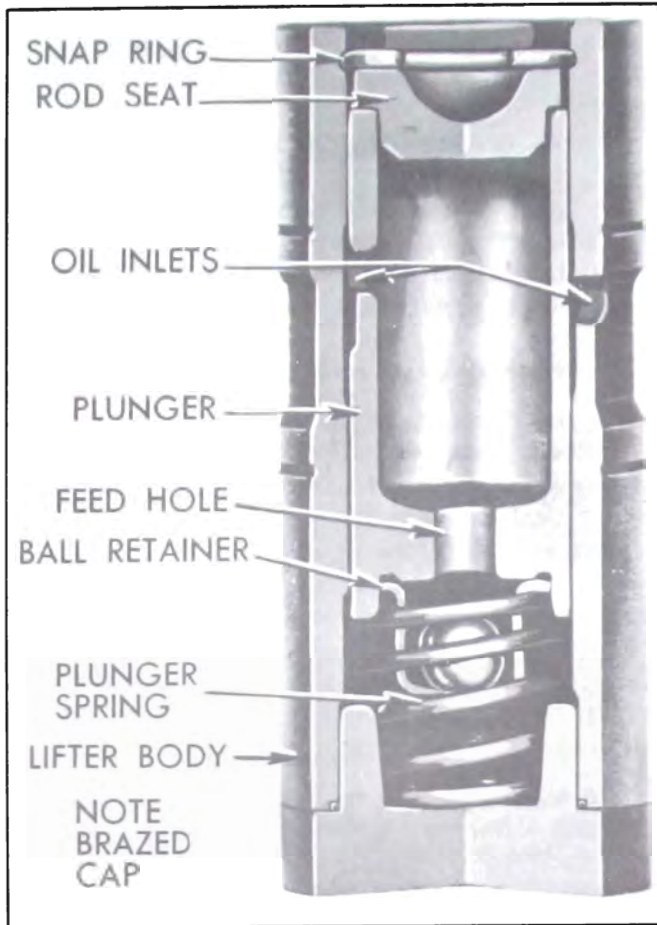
Hydraulic Valve Lifter, Sectional View
